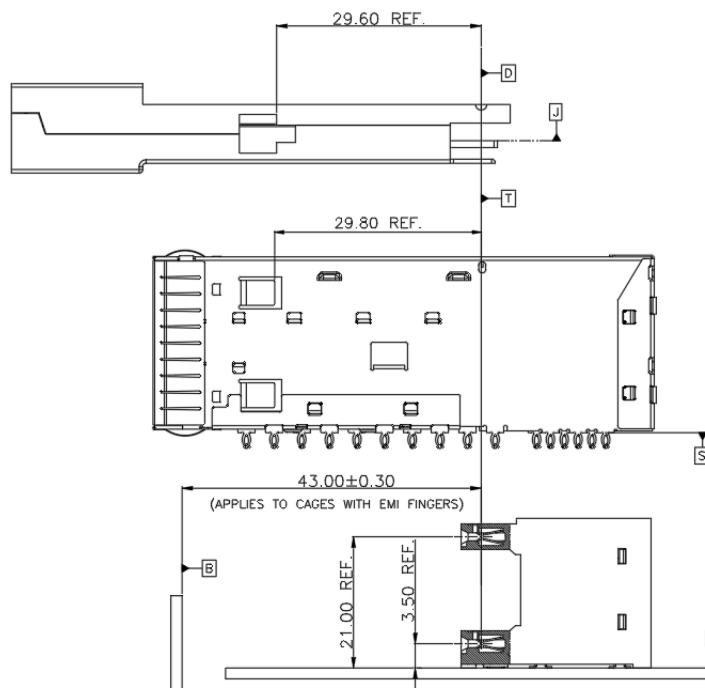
QSFP112 2X1 SMT Connector/Cage/Module Datum
